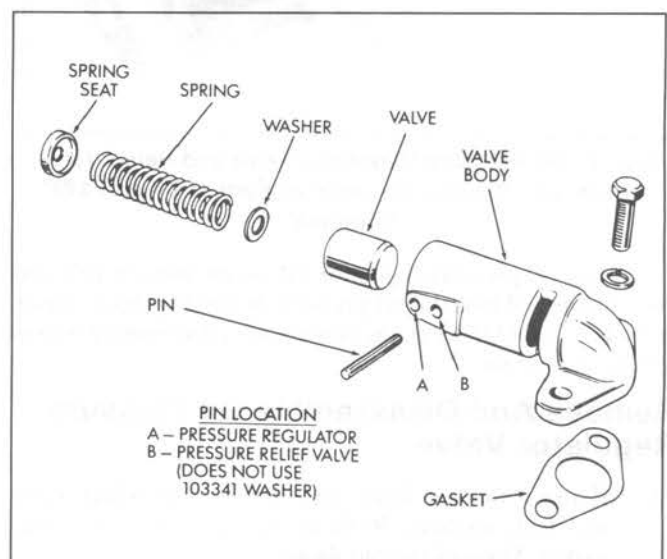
Oil Pressure Regulator Valve and Relief Valve and Relative Location of Parts
